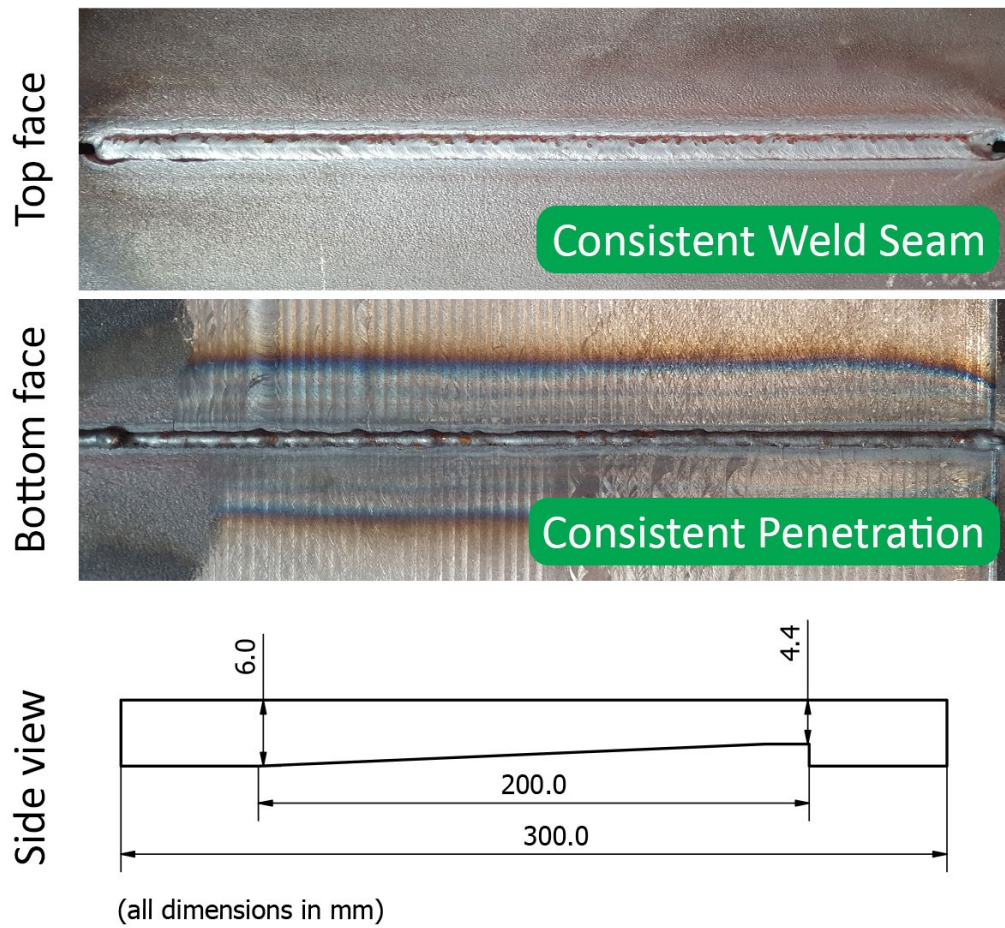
Calibration GTAW butt-weld of two mild steel plates with a machined slope representing wall thickness loss from 6.0 mm to 4.4 mm (measured using calibrated digital callipers).
